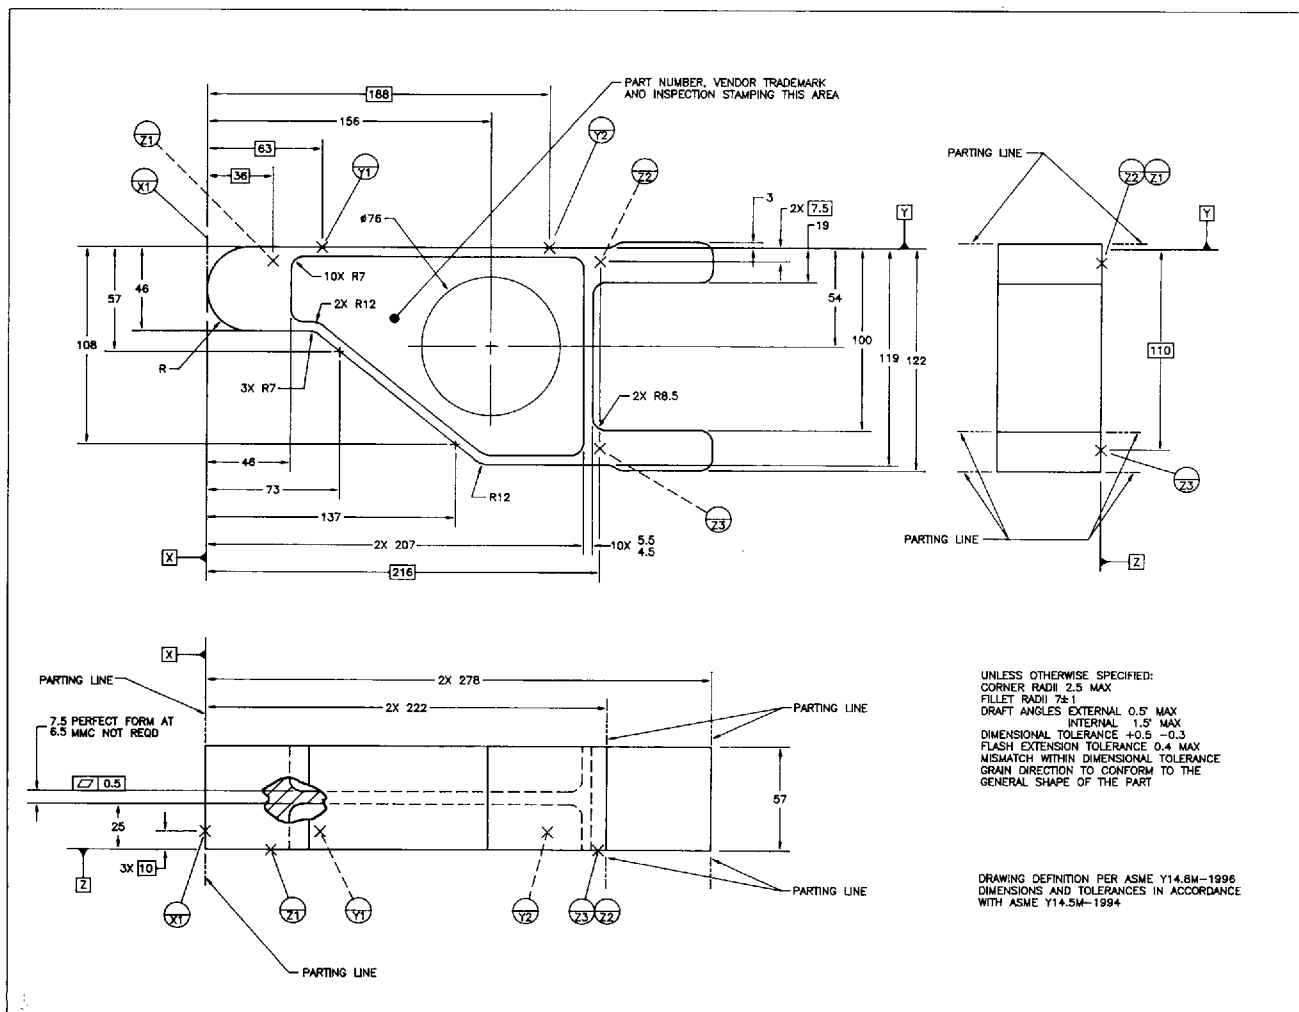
PRECISION FORGING DRAWING SAMPLE
